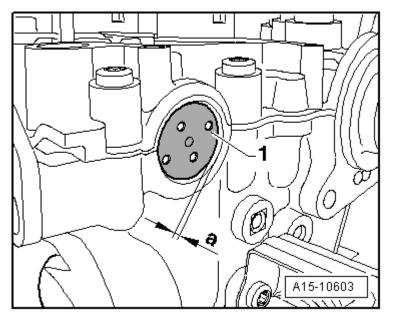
Identifying Thrust Piece T10174 To Drive In Cap Courtesy of VOLKSWAGEN UNITED STATES, INC.
